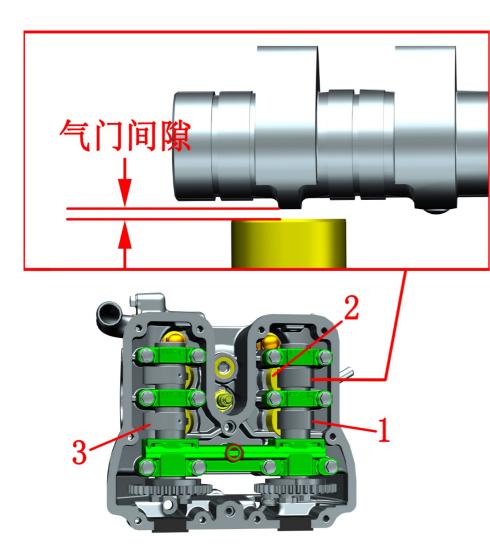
CYLINDER HEAD		Adjust the valve clearance	CHK	Q
